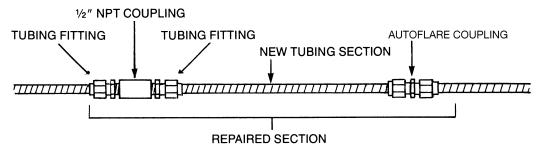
Repair of Damaged Tubing with a New Section of Tubing and a joint splice or an CounterStrike AutoFlare Coupling
